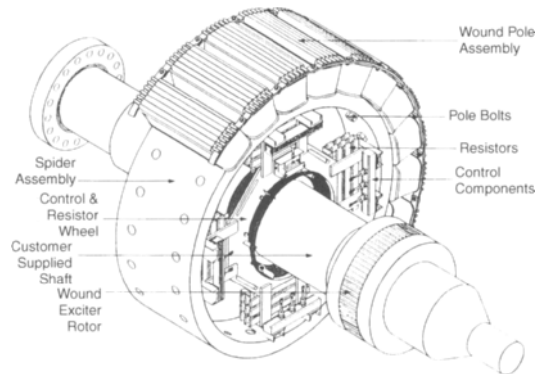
C. Engine-type synchronous motor. Compressor manufacturer furnishes the motor shaft and motor bearings. A solid hub is used for maximum mechanical strength. (Used by permission: Bul. WMC-04A-94. TECO-Westinghouse Motor Co.)
